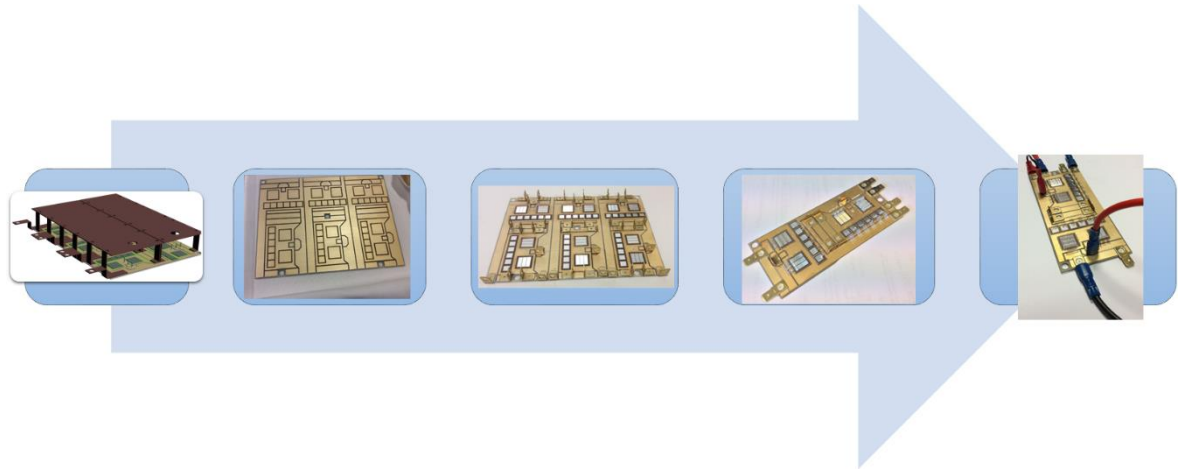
Process of fabricating the power bridge: (i) design, (ii) fabricating the layout of DBC, (iii) soldering devices (iv) wire bonding and (v) testing.
